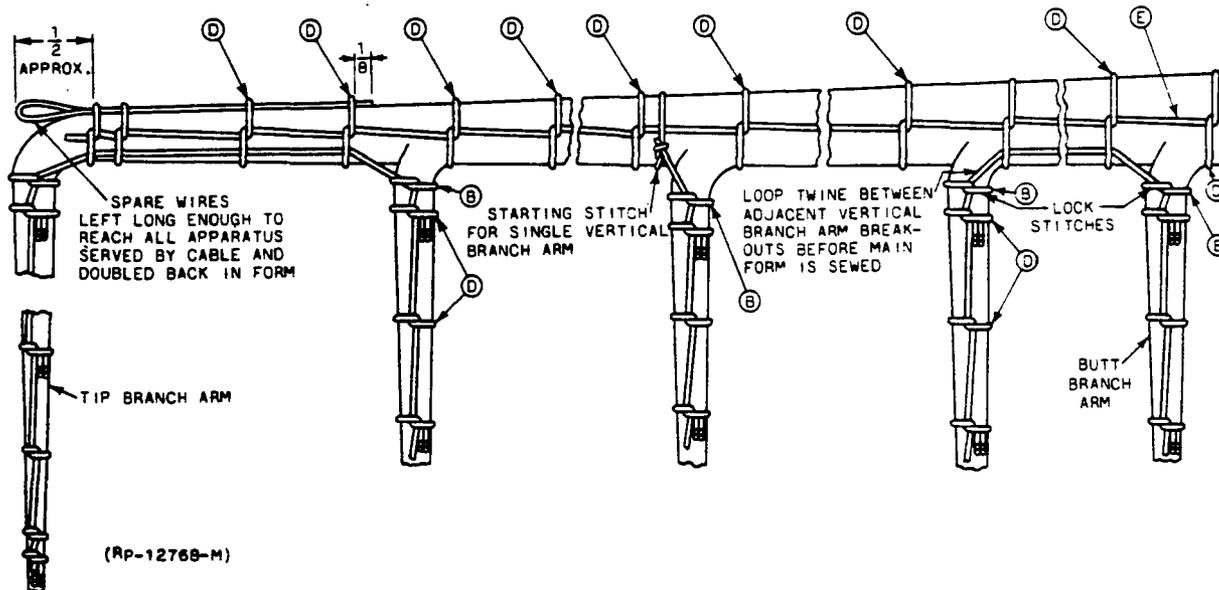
SEWING REQUIREMENTS FOR SEWED FORMS AND SUPERIMPOSED WIRING (CONT'D)
